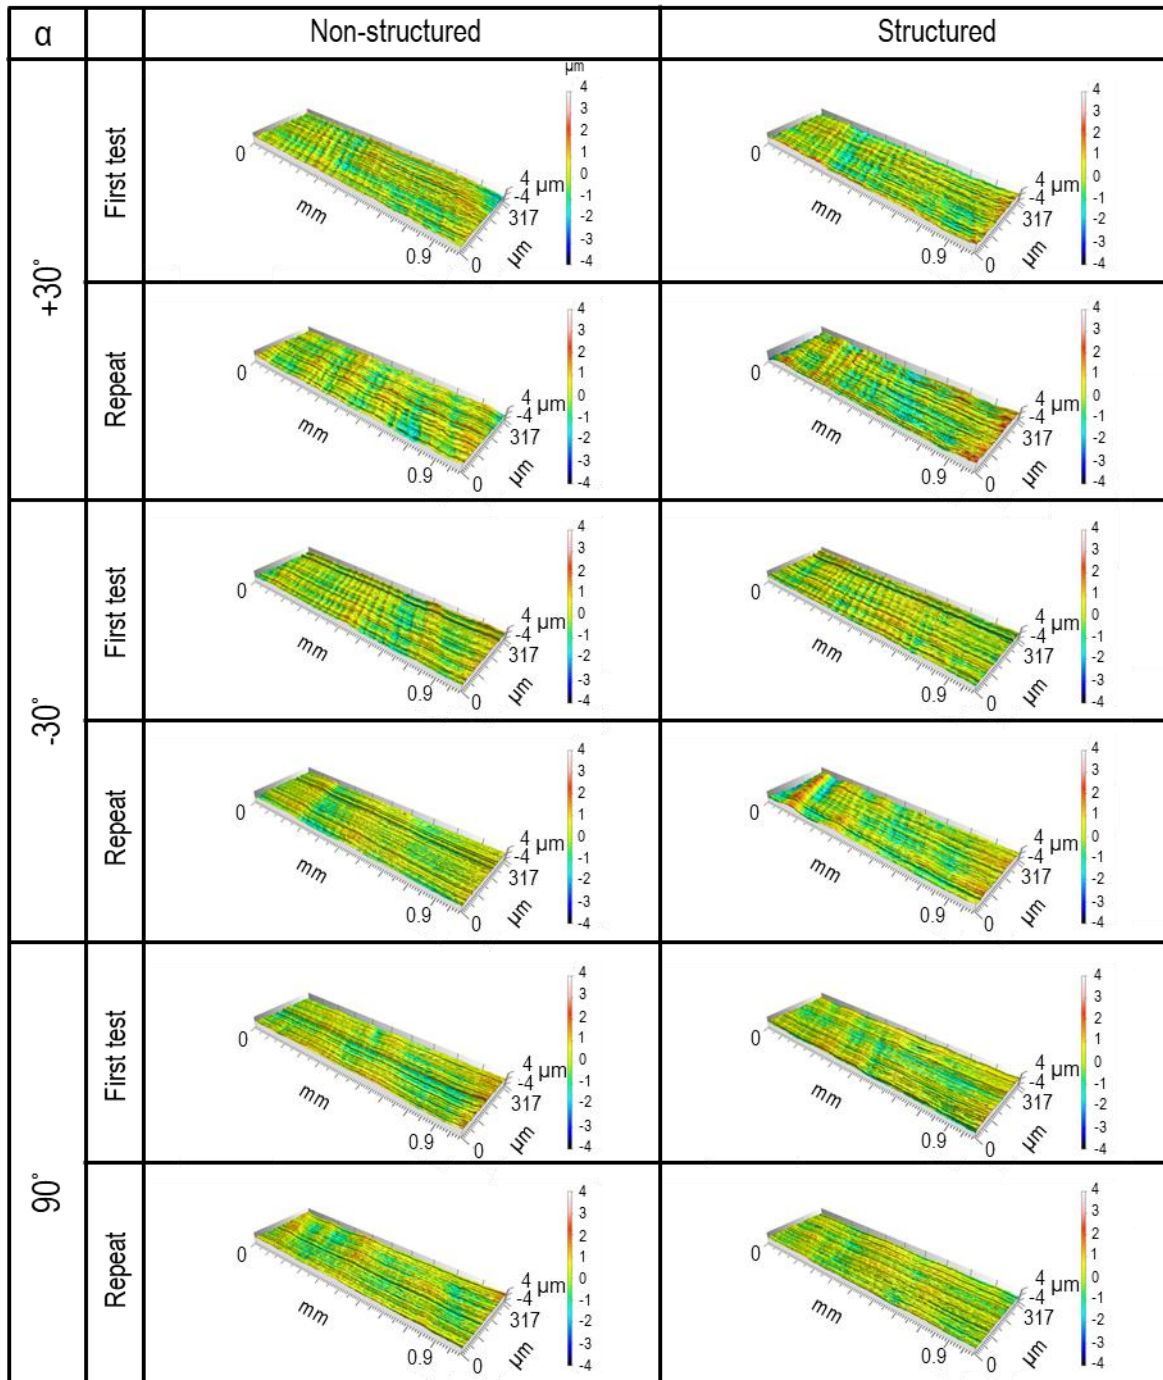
Machined surfaces for structured and non-structured parts at $f_z = 10 \mu\text{m/tooth}$.
